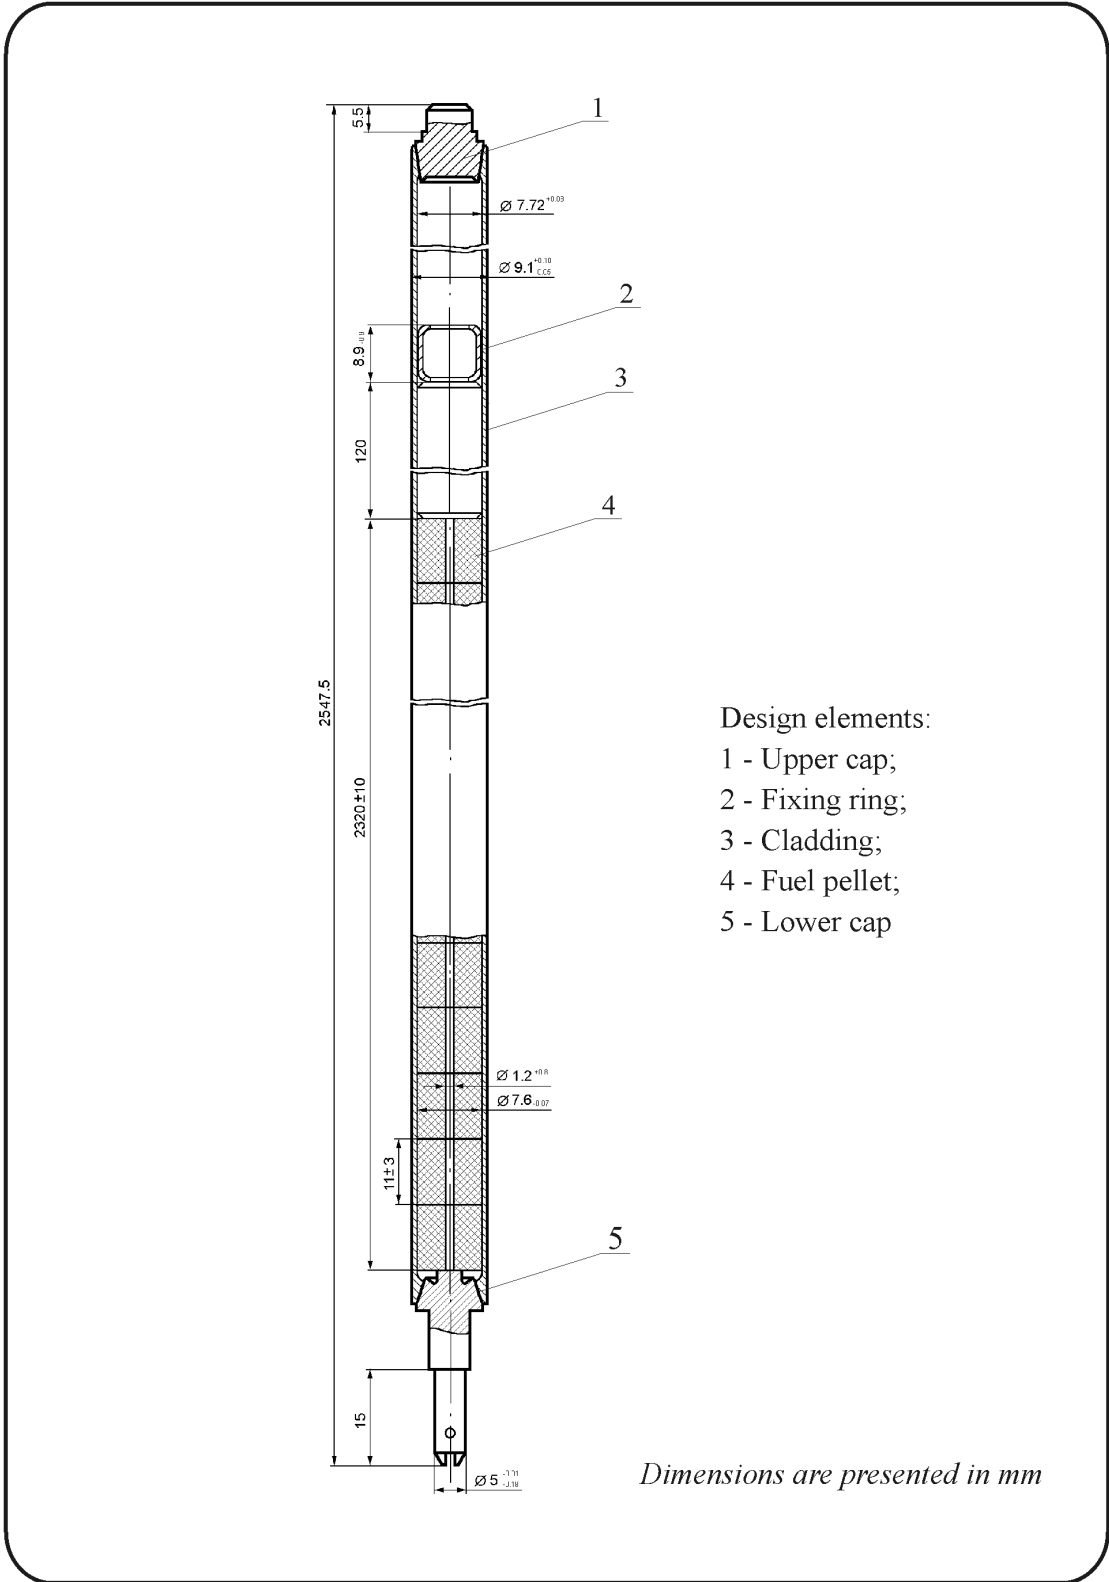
Design scheme of VVER-440 commercial fuel rod from the fuel assembly #23635228
